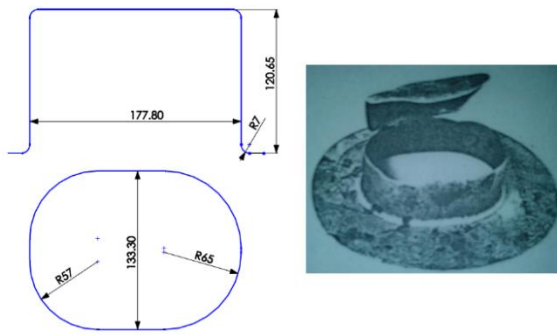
Geometry of Compressor Housing and the ruptured part, dimensions are in millimeters.
